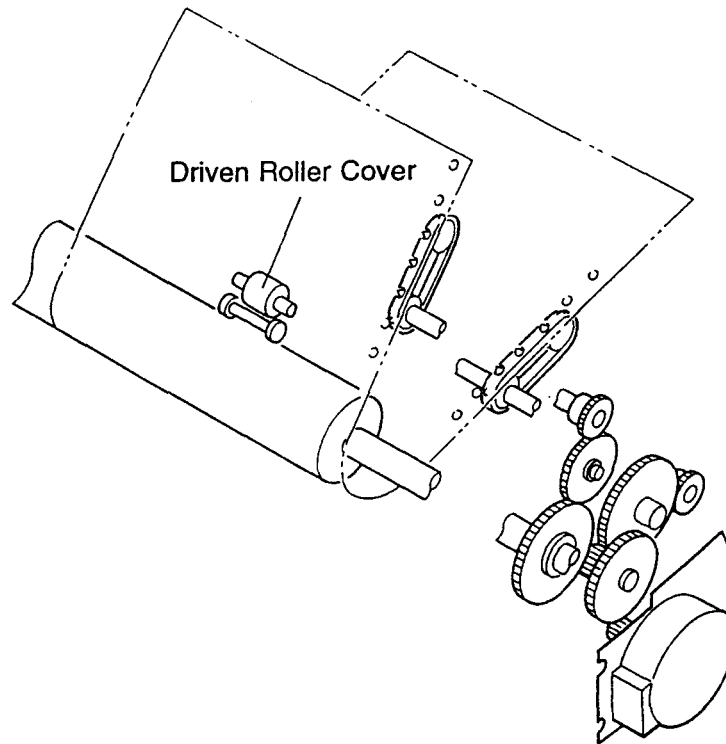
Push-Pull Tractor Paper Advance Mechanism
